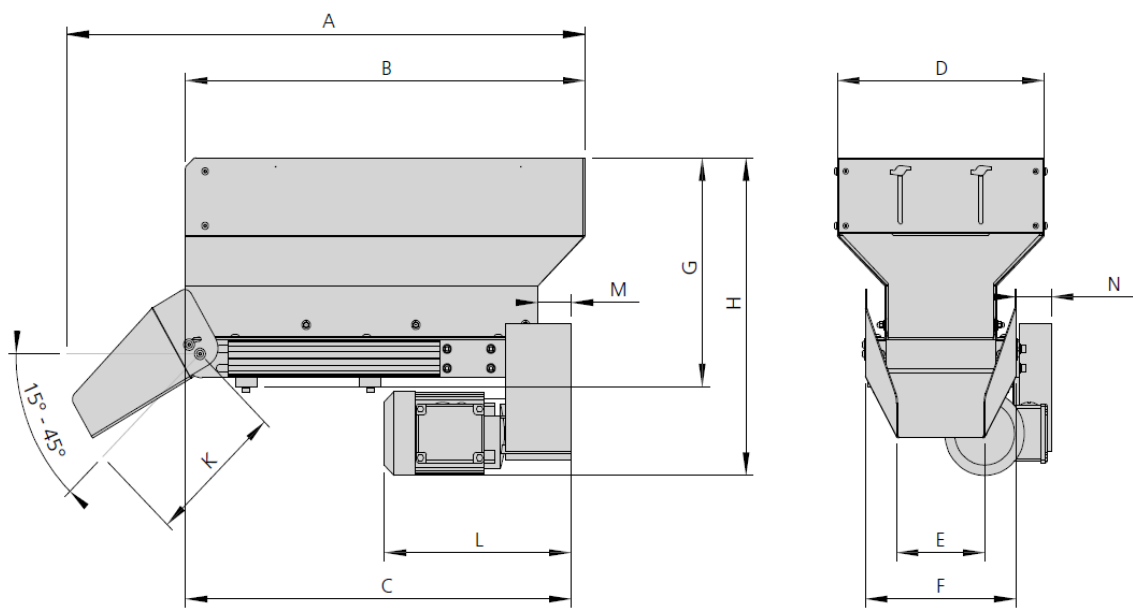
Dimensional drawing - IBB 12/ IBB 25 / IBB 50
